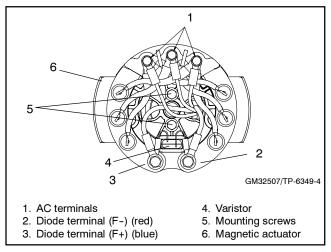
Rotating Rectifier Assembly Hub and Components
